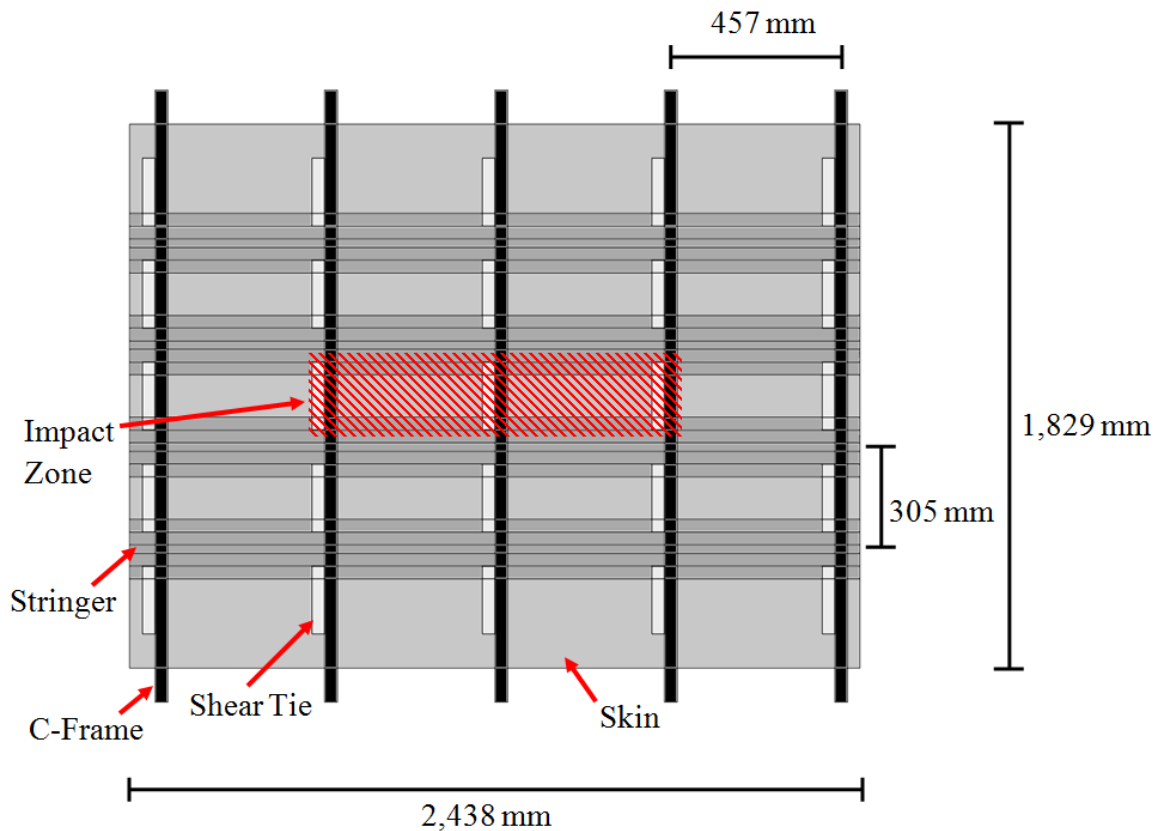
Plan view of specimen Frame03 and Frame04 panel configuration and loading location
